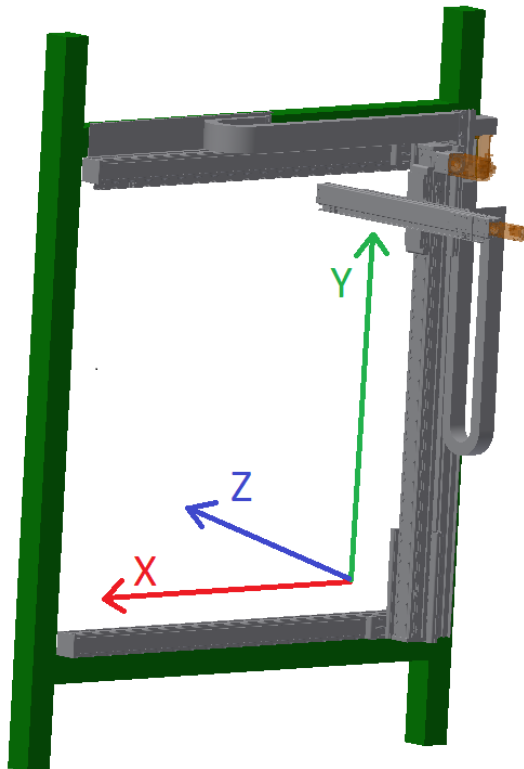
CAD drawing of robot supplied by manufacturer together with the mounting frame shown in green
